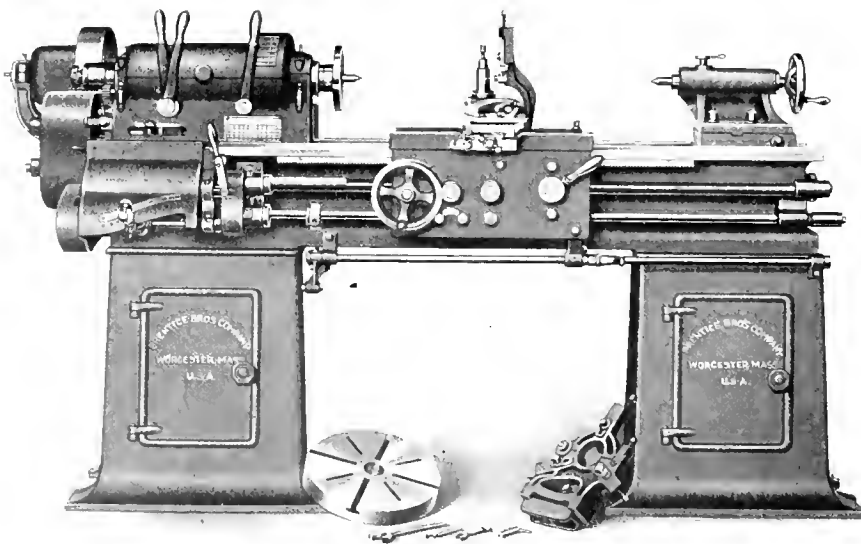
Geared-head Prentice Lathe with Reversing Mechanism incorporated
